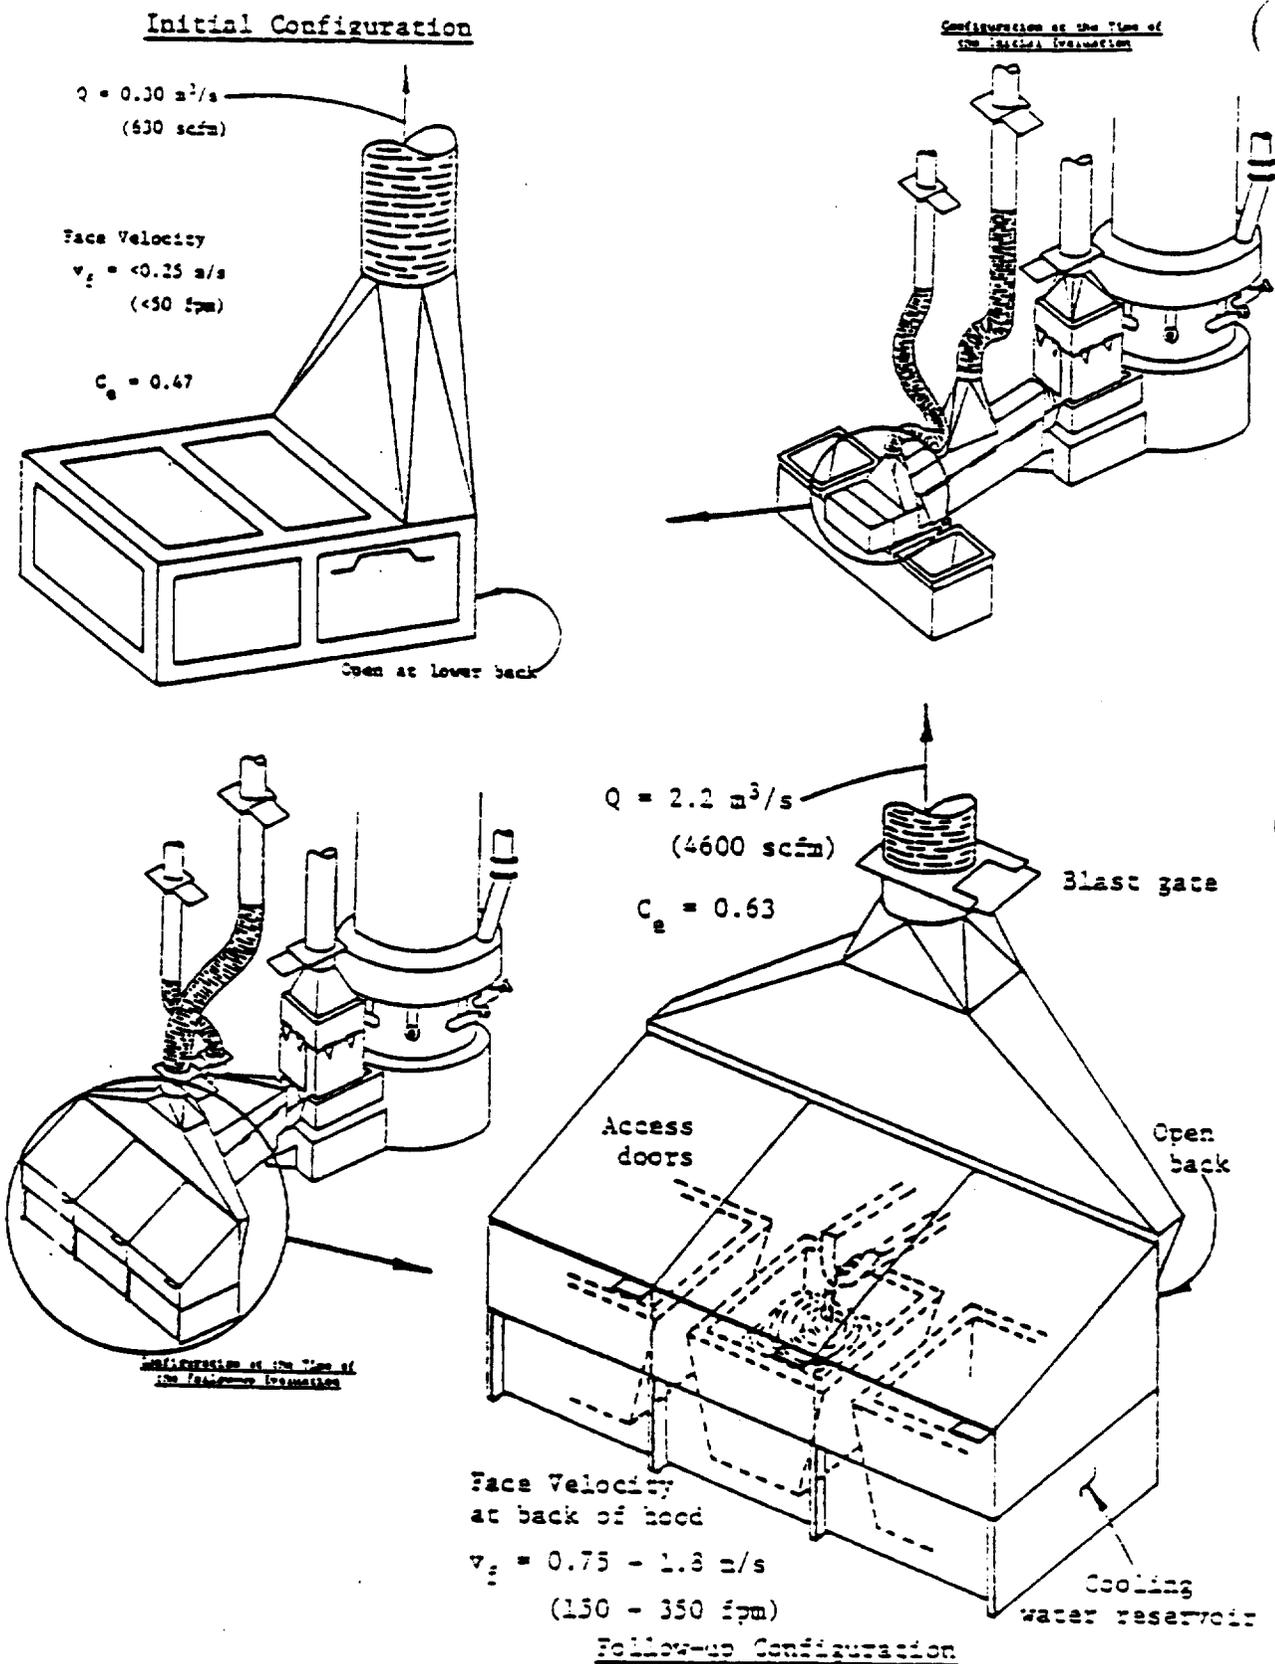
BLAST FURNACE BLOCK CASTING HOOD
